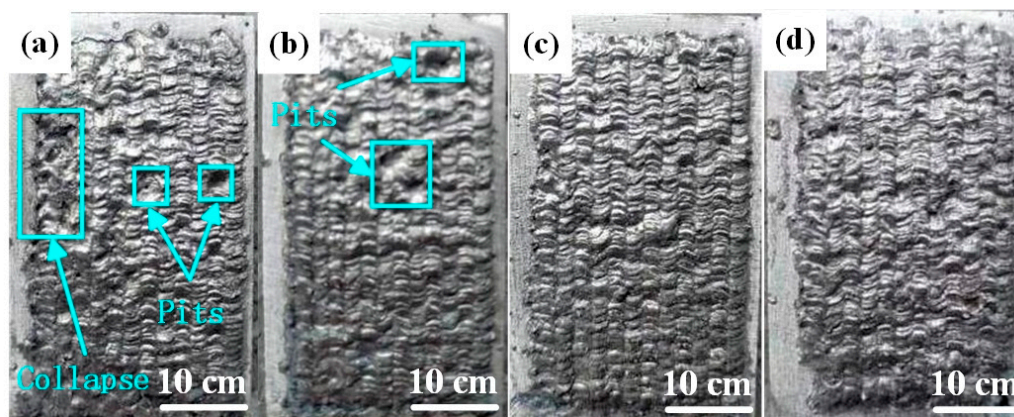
The macroscopic morphology of Al-Ni coatings under different scanning speeds: (a) 360 mm/min; (b) 480 mm/min; (c) 600 mm/min; (d) 720 mm/min.
